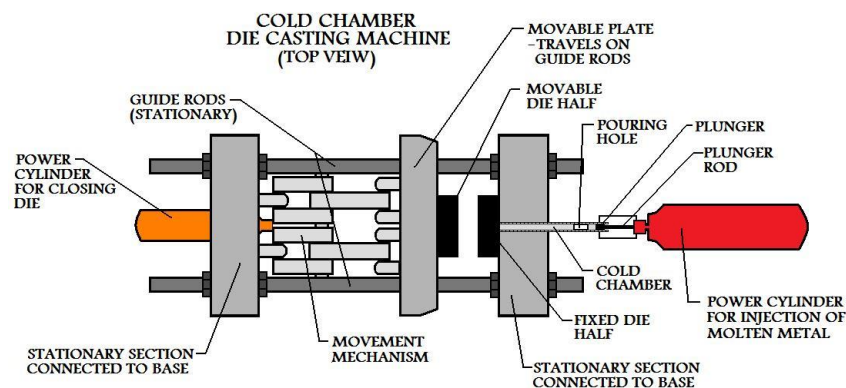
Cold chamber die cast machine schematic (The Library of Manufacturing, n.d.)
